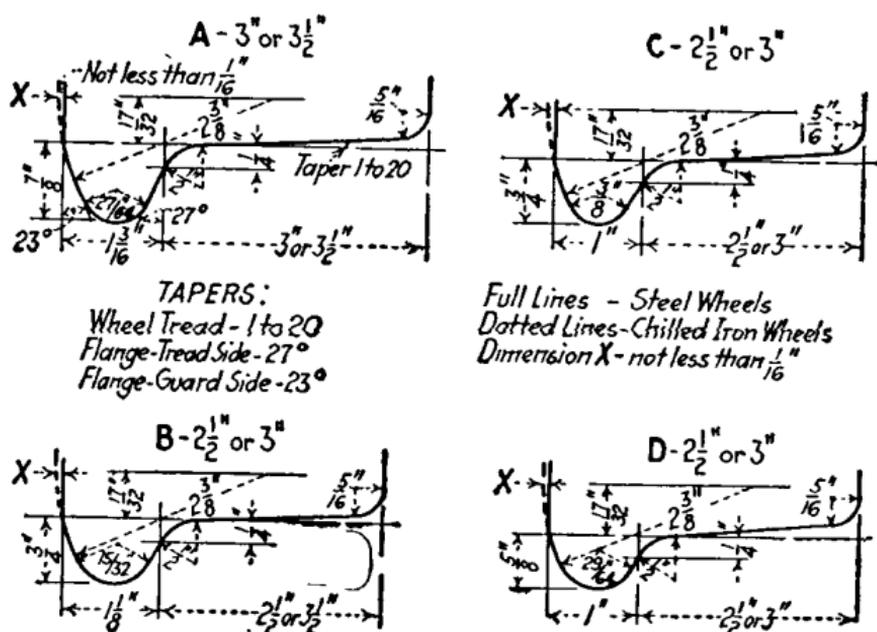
A.E.R.E.A. standard tread and flange contours for steel and chilled iron wheels.
